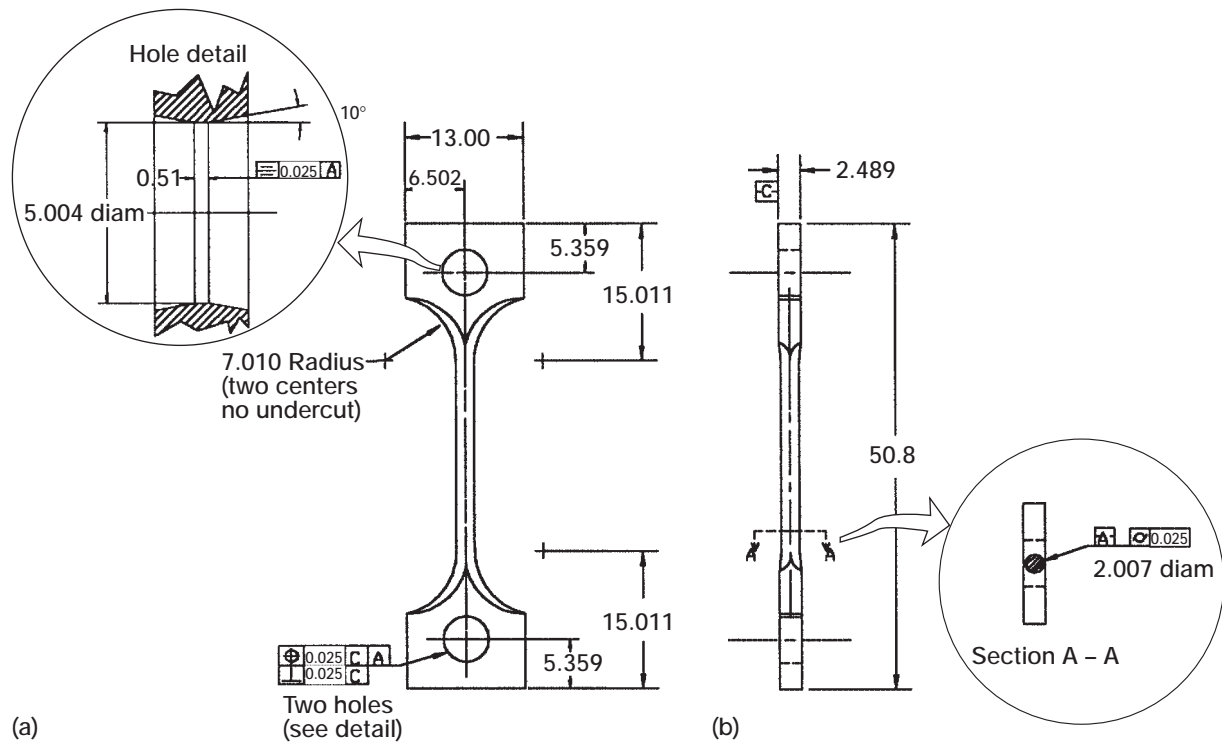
Tension creep test specimen. All dimensions given in millimeters. (a) Front view. (b) Side view.
